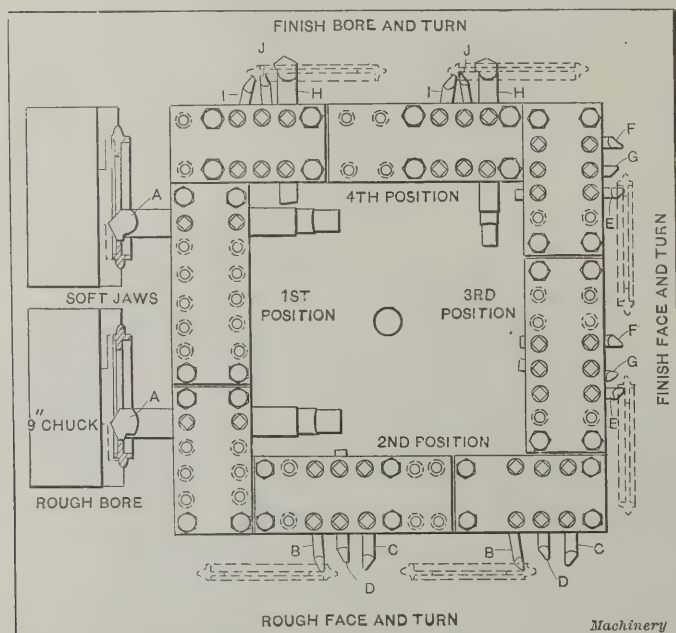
Diagram showing Tool Equipment and Successive Steps in Machining Sprocket Blanks on Double-spindle Flat Turret Lathe
